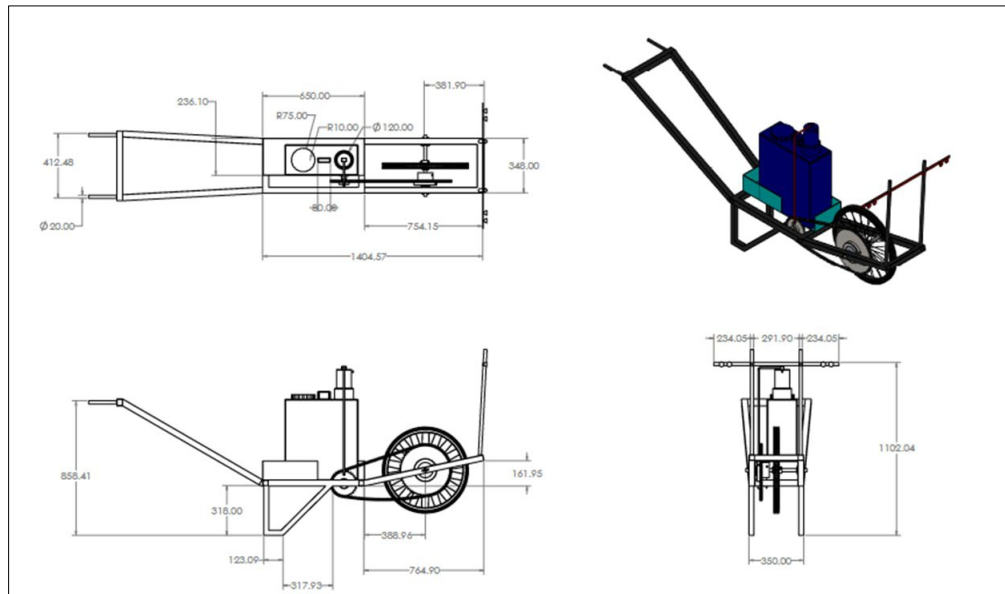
Full assembly drawing of Semi-Automatic Fertilizer Sprayer
